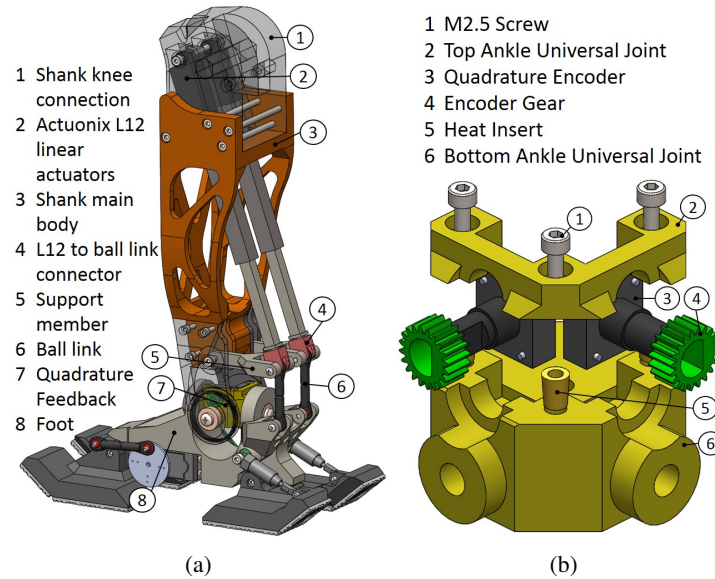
(a) Second ankle design (b) Exploded view of ankle universal joint
